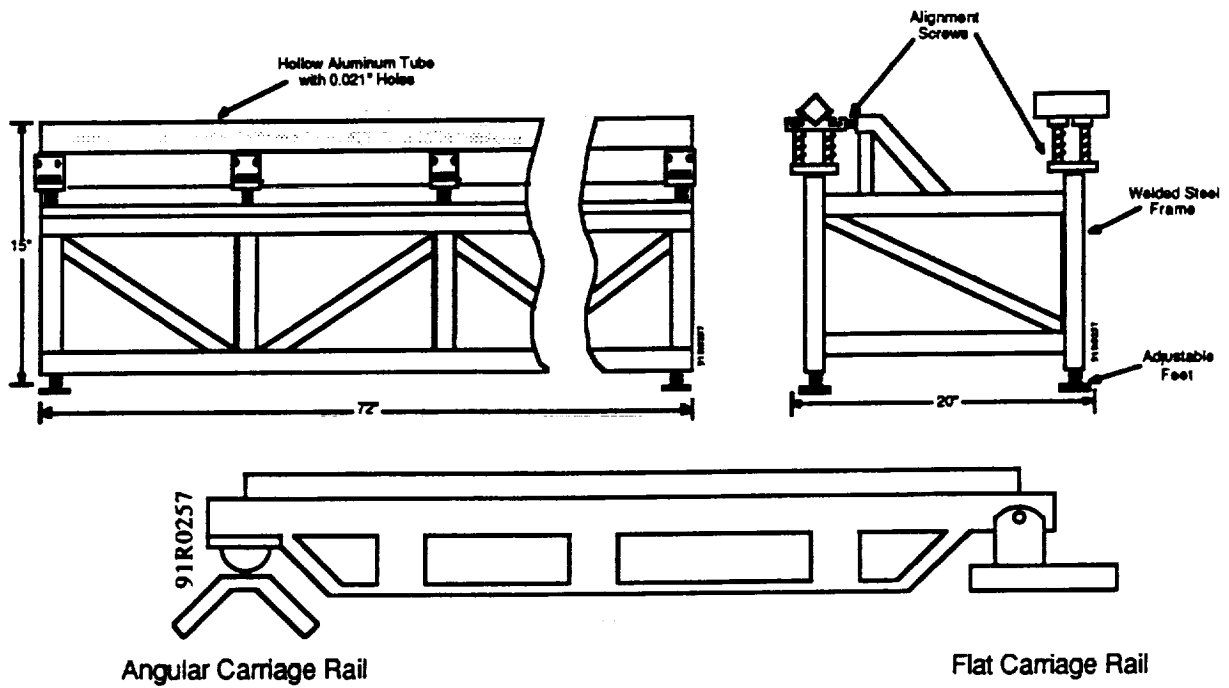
a) Side View of Single-Axis Air Bearing Table, b) Front View, c) Front View of Carriage
